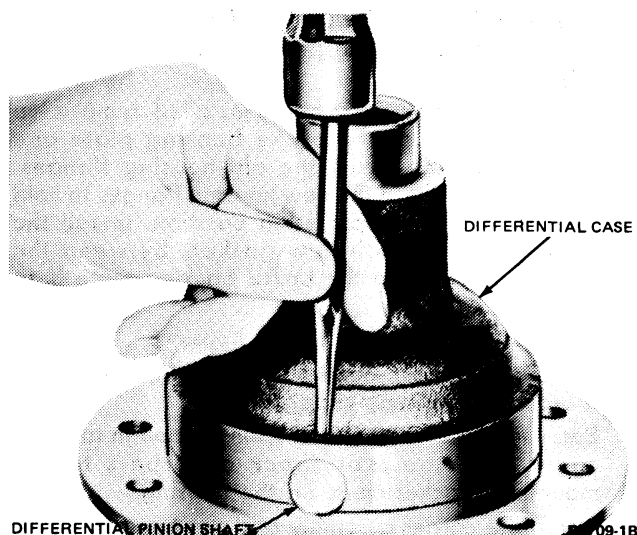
Removing Differential Pinion Shaft Lock Pin
